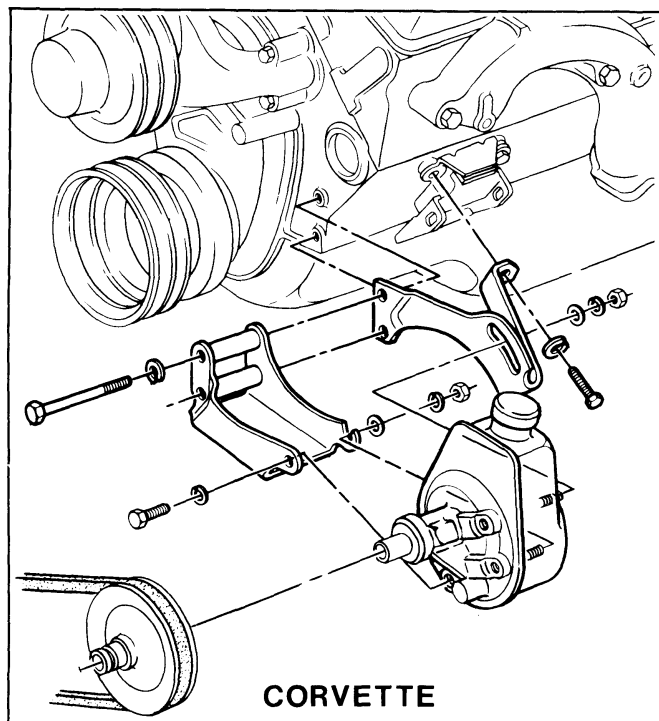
B-131--Power Steering Pump Mounting - Corvette
